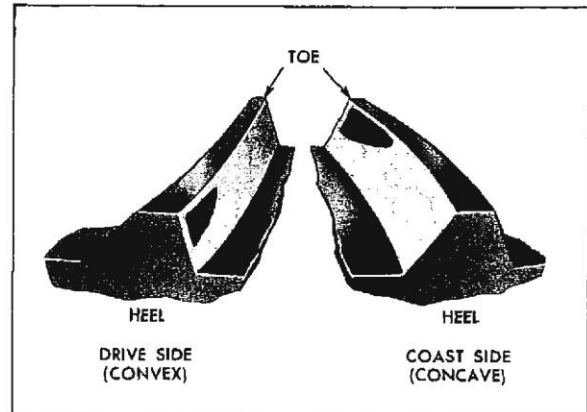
Tooth Pattern - Pinion Too Far Away From Ring Gear (Shim Pack Thickness Insufficient)
